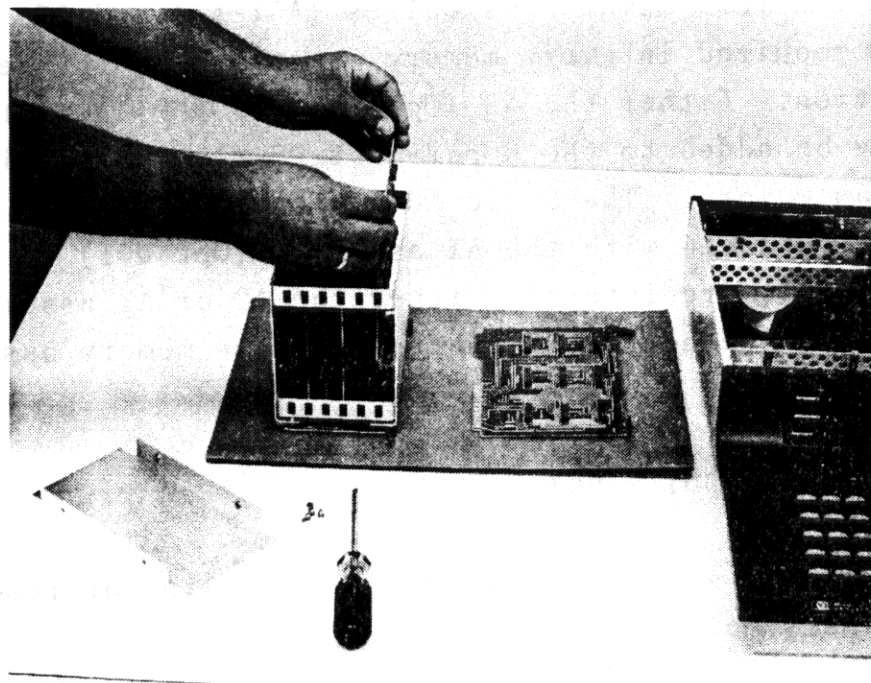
Exchanging PC Boards in the Memory Assembly
